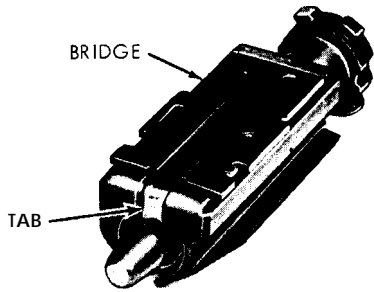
Disassembly/assembly of trigger guard group (3 of 3).
